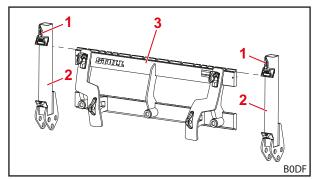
Slide the frame parts on the frame (example: large bale fork HS with foldable tines)
